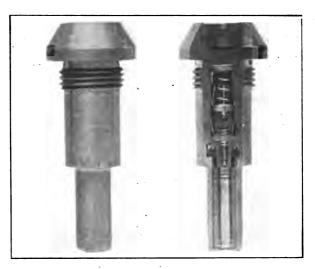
Detonating delay fuze, Mark IV. Exterior view and section.
